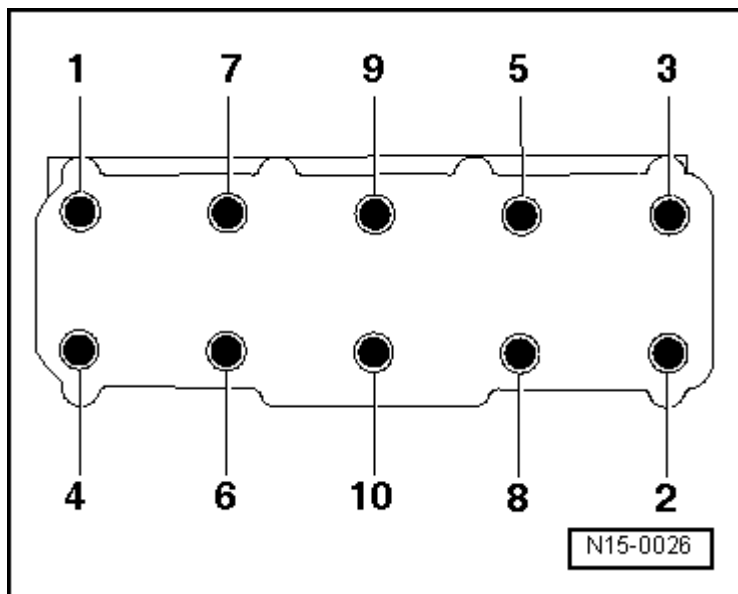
Identifying Cylinder Head Bolts Loosening Sequence
